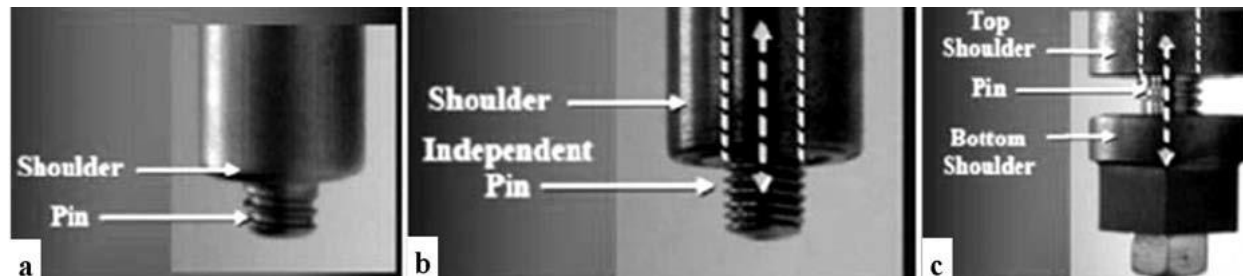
FSP different types of tools. a) fixed, b) adjustable, c) bobbin
